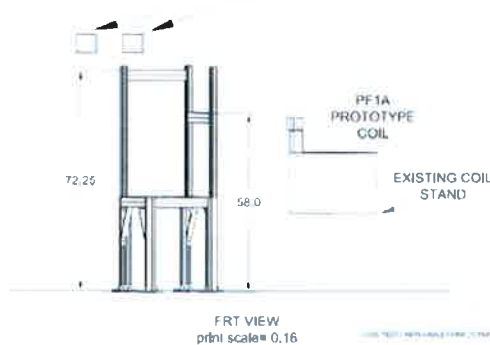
Layout for new cable support to connect coil on Test stand to cables
